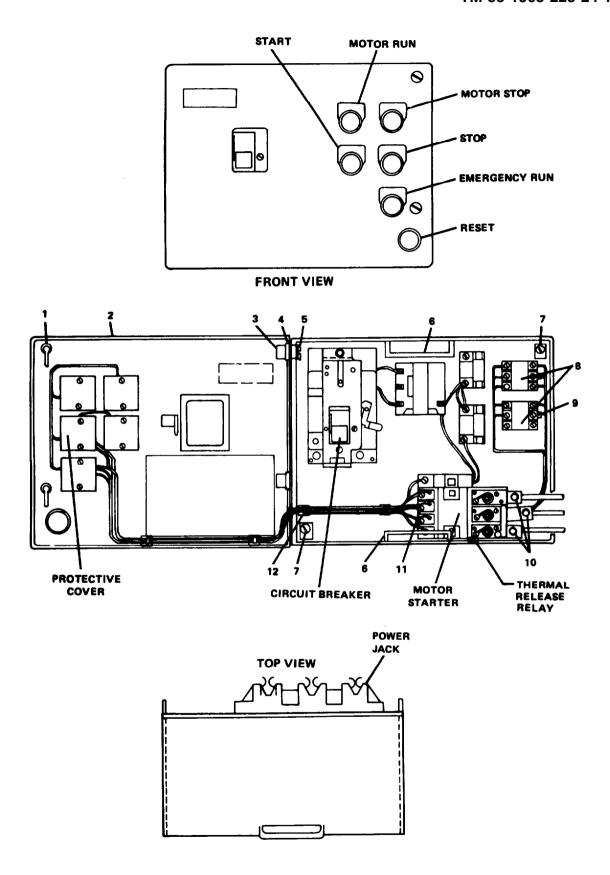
Motor Controller (Emergency Lube Oil Prelube Pump).
